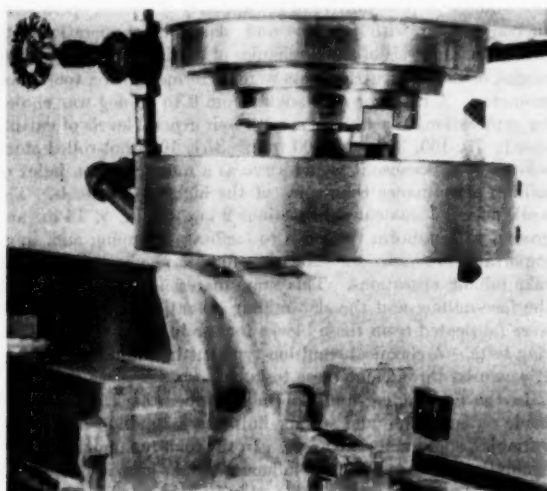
EXPERIMENTAL FACE-MILLING SETUP FOR TOOL-LIFE TESTS
